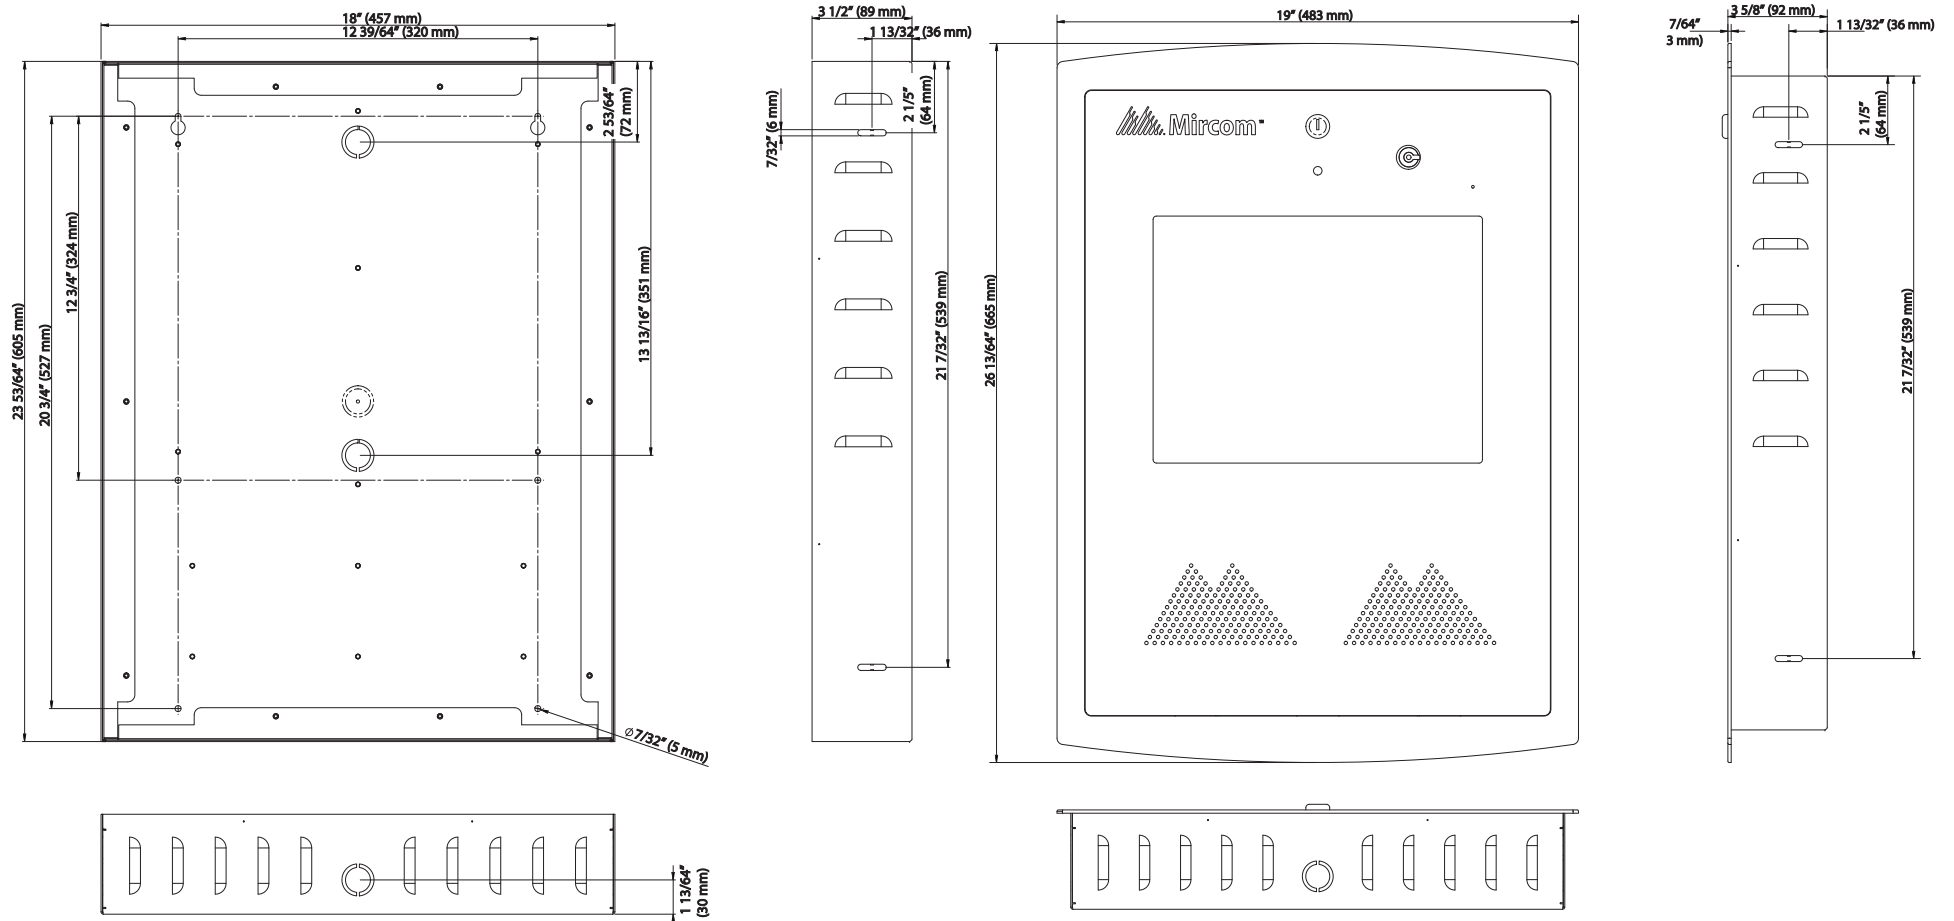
Dimensions of the 15" Flush Mount Touch Screen
